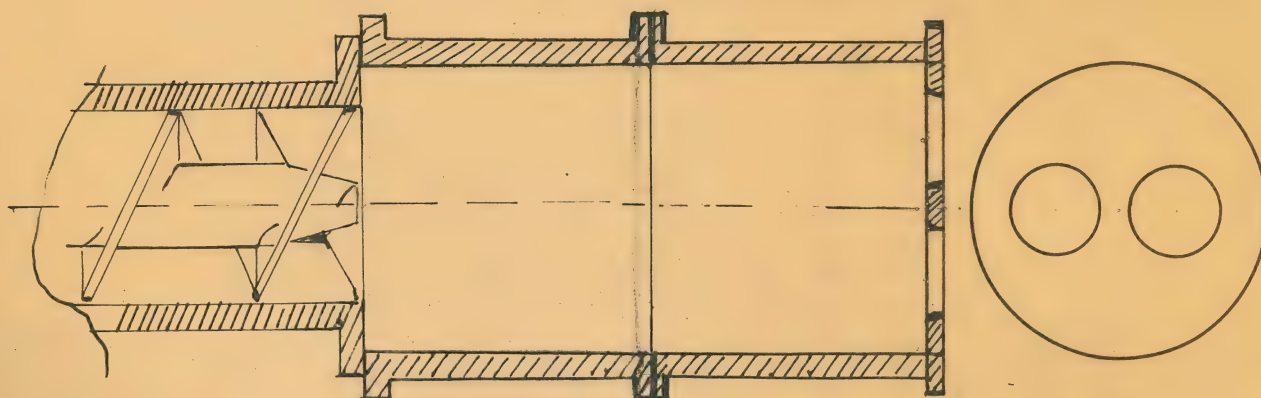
Additional, large diameter barrels and double extrusion die produce solid blanks.
